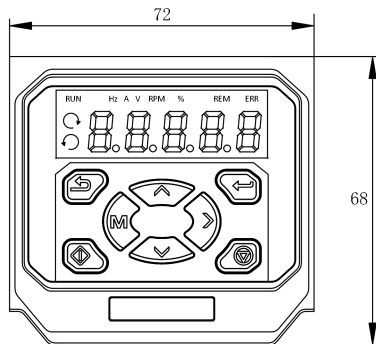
MV810-DP01 appearance and mounting dimensions (unit: mm)
